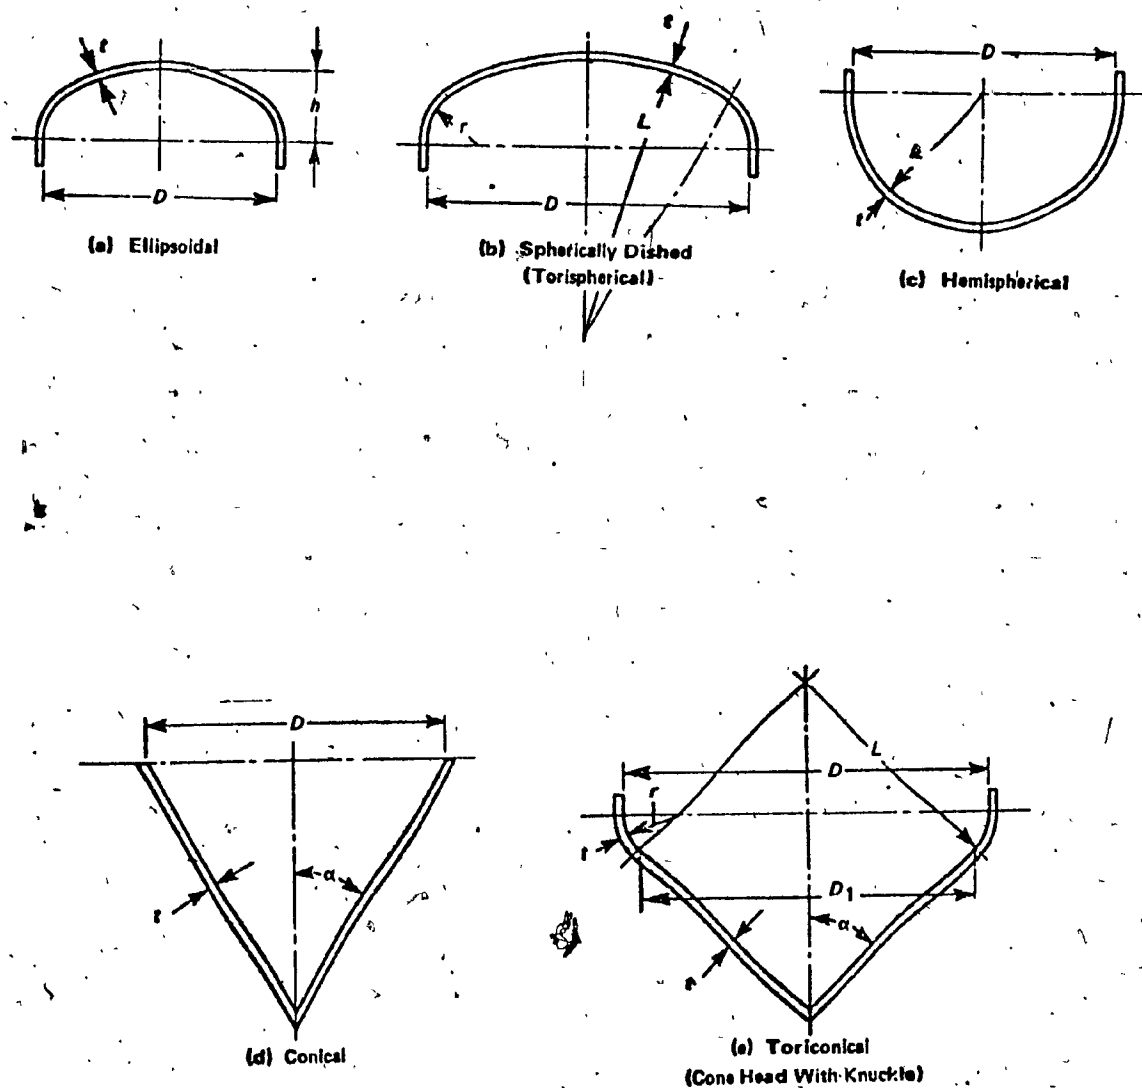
Principal Dimensions of Typical Heads [22]
